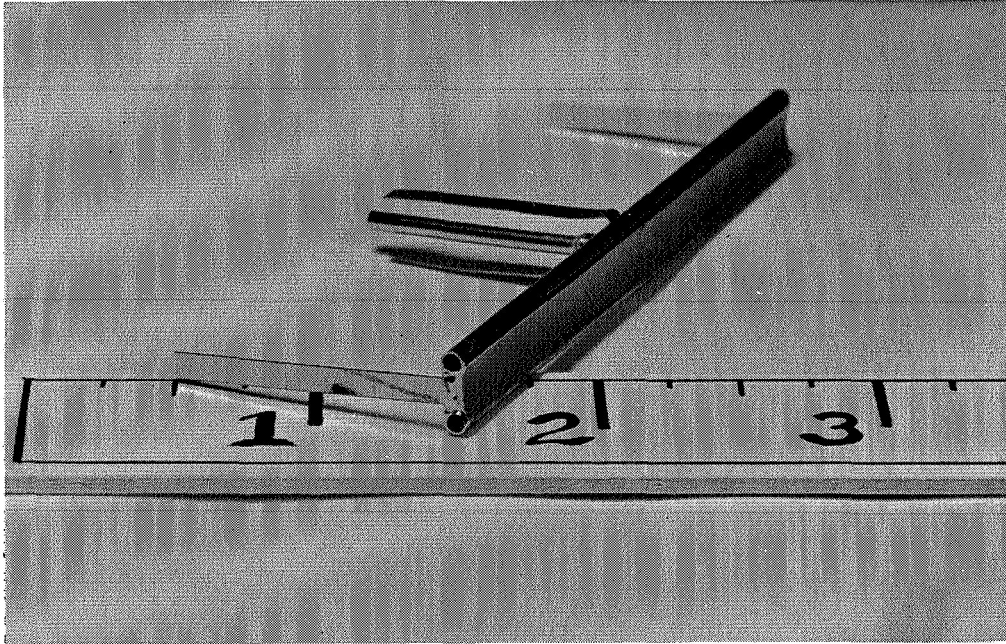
Low Mass Ionizer Showing Heater Tubes, Manifold Plates, Support Straps, and Feed Tube, All Electron-Beam Welded to the Porous Emitter (Scale in Inches).
